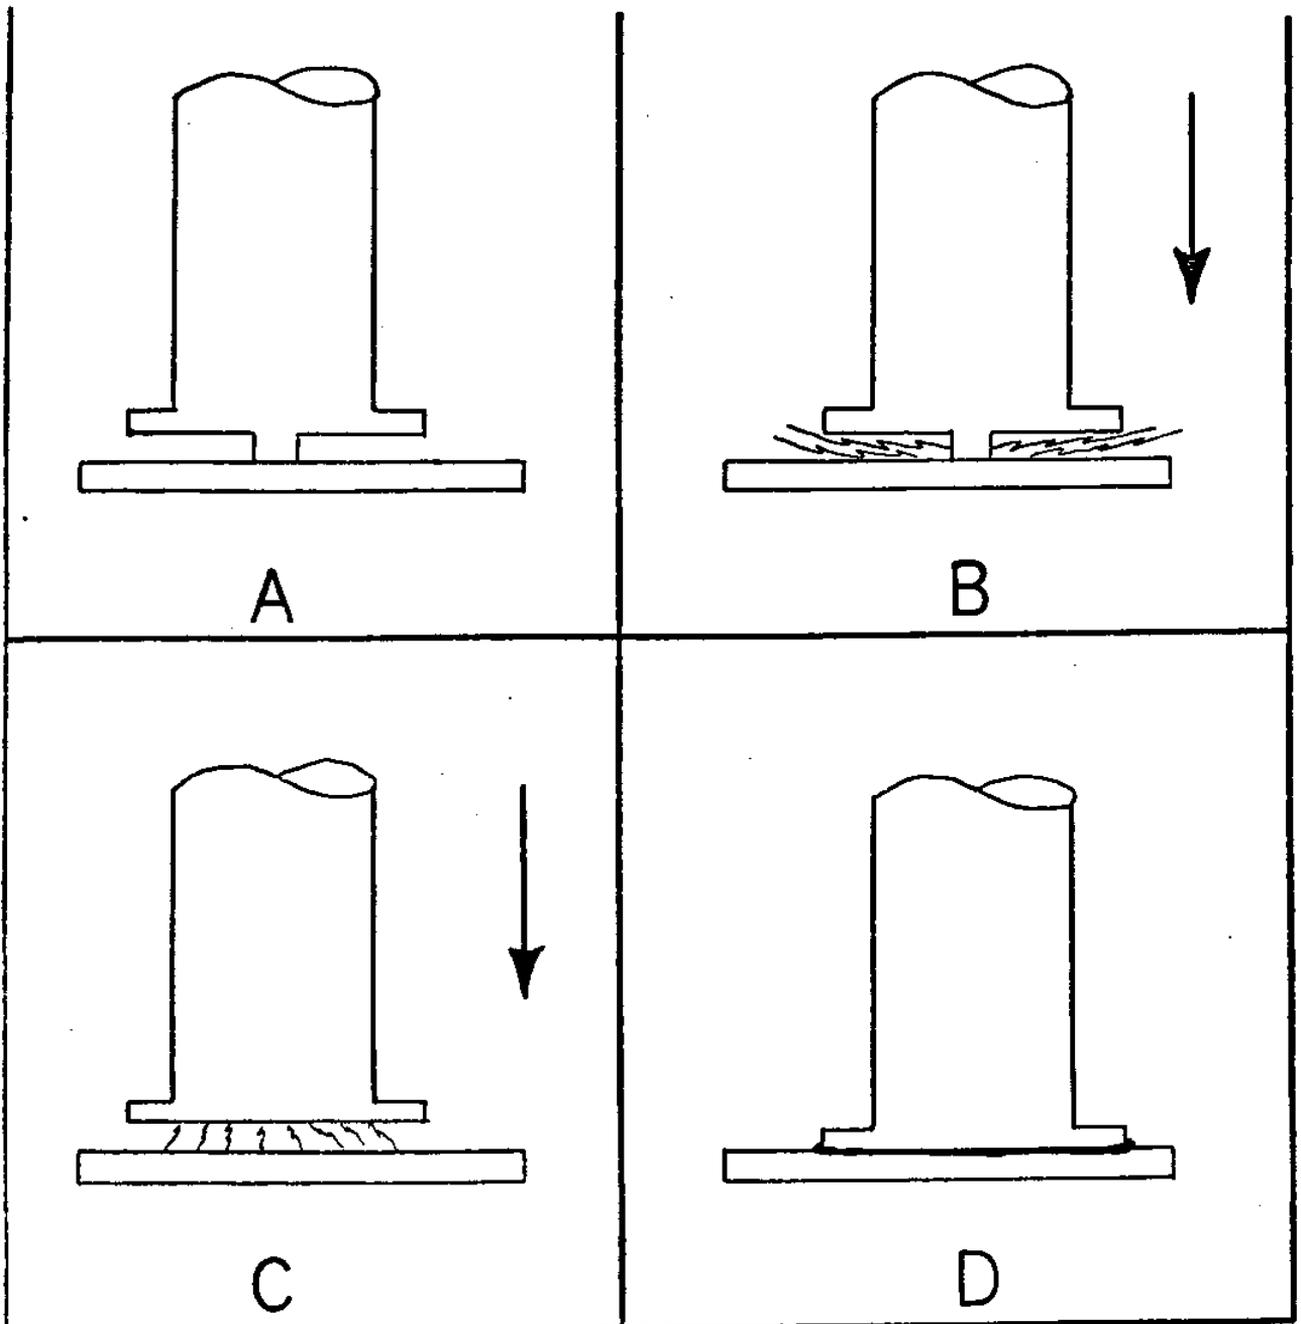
³² Schematic of initial contact capacitor discharge stud welding; (A) Stud placed against work, (B) Stored energy creates arc at stud tip, (C) Tip flashes off as stud plunges into molten metal, (D) Completed weld
